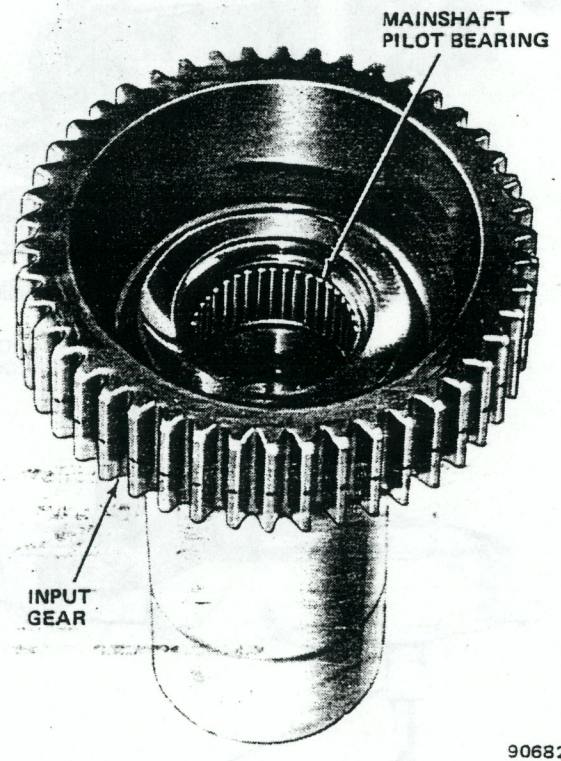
D-34 Mainshaft Pilot Bearing Installation
